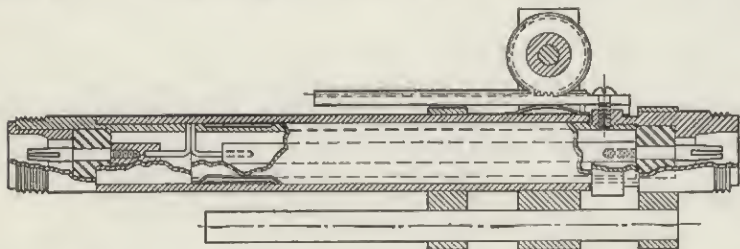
Assembly sketch of the TPS-15 cutoff attenuator.
